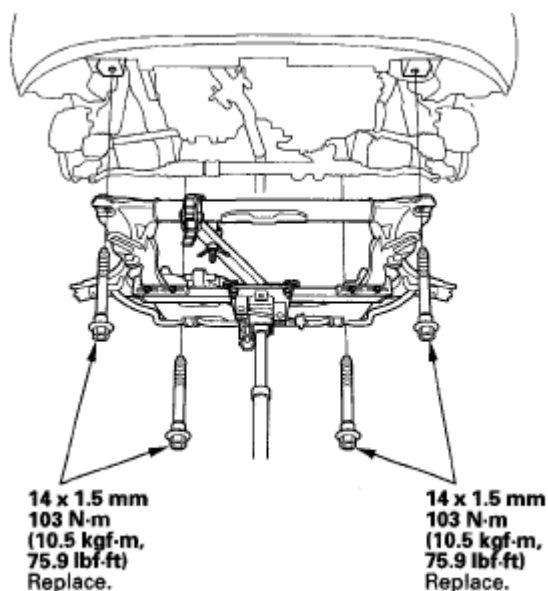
Identifying Subframe Mounting Bolts (With Torque Specifications)
